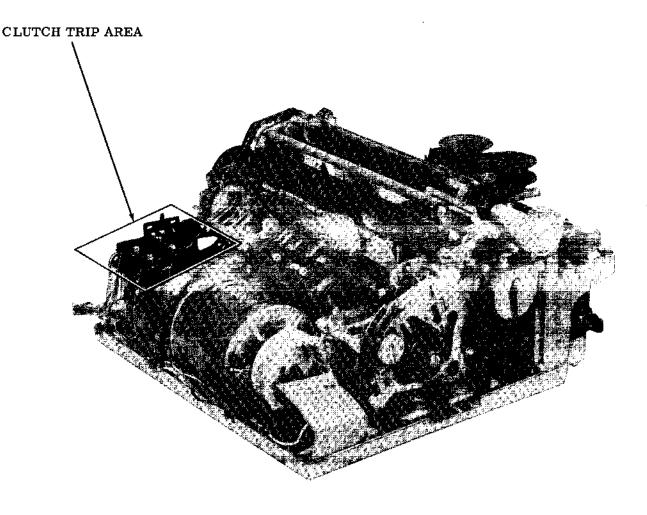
Clutch Trip Area (Without Reader Feed Magnet Contact Assembly)
